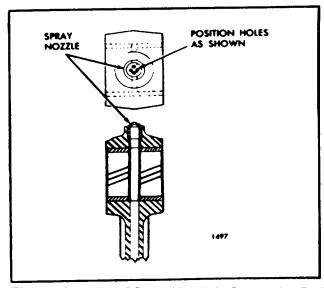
Location of Spray Nozzle in Connecting Rod
